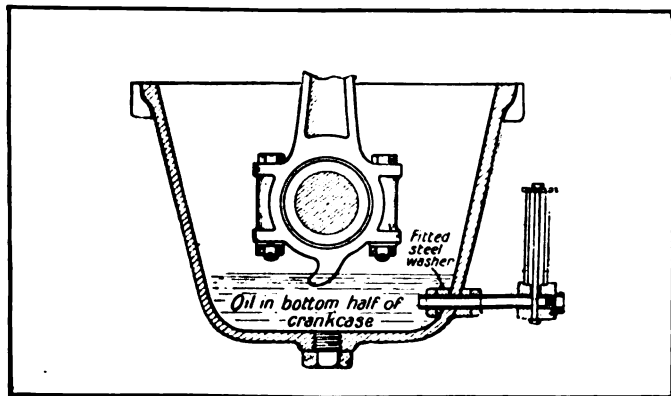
Showing Construction Details of Oil Gauge Fitted to an Old Motor.
